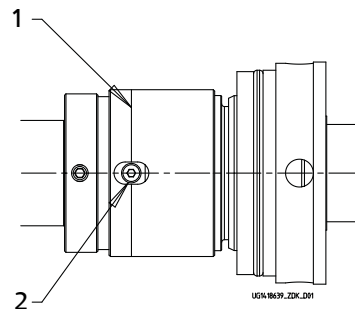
Correct position of KSB mechanical seal type 4 HL
